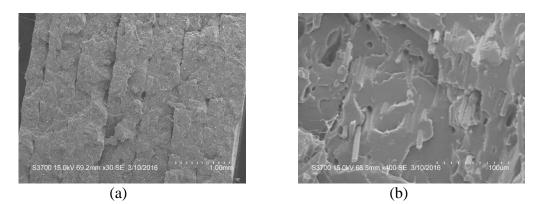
Diagonal CF PLA Fracture Surface (a) x30 (b) x400
